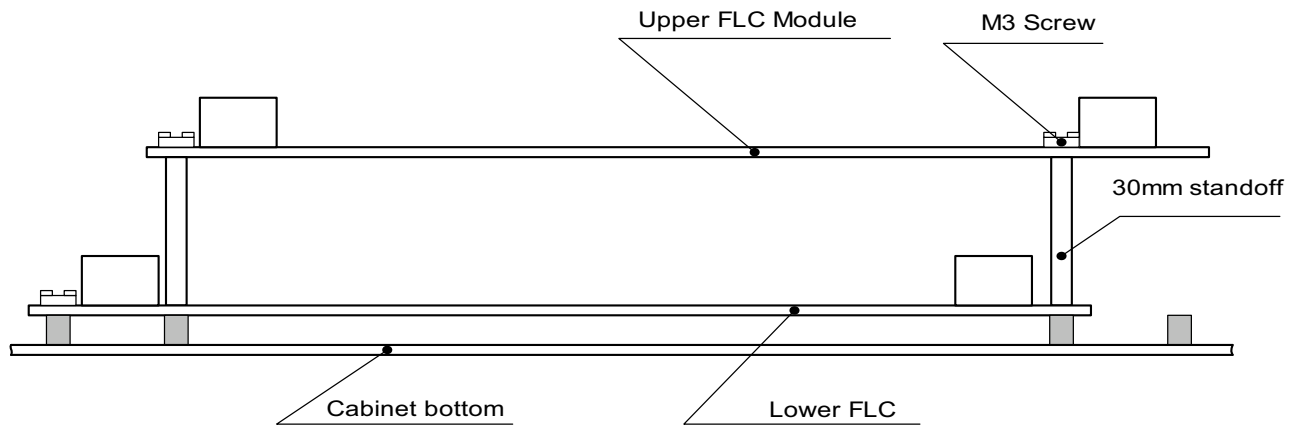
Optional FLC module mounting in Main Cabinet (side view).
